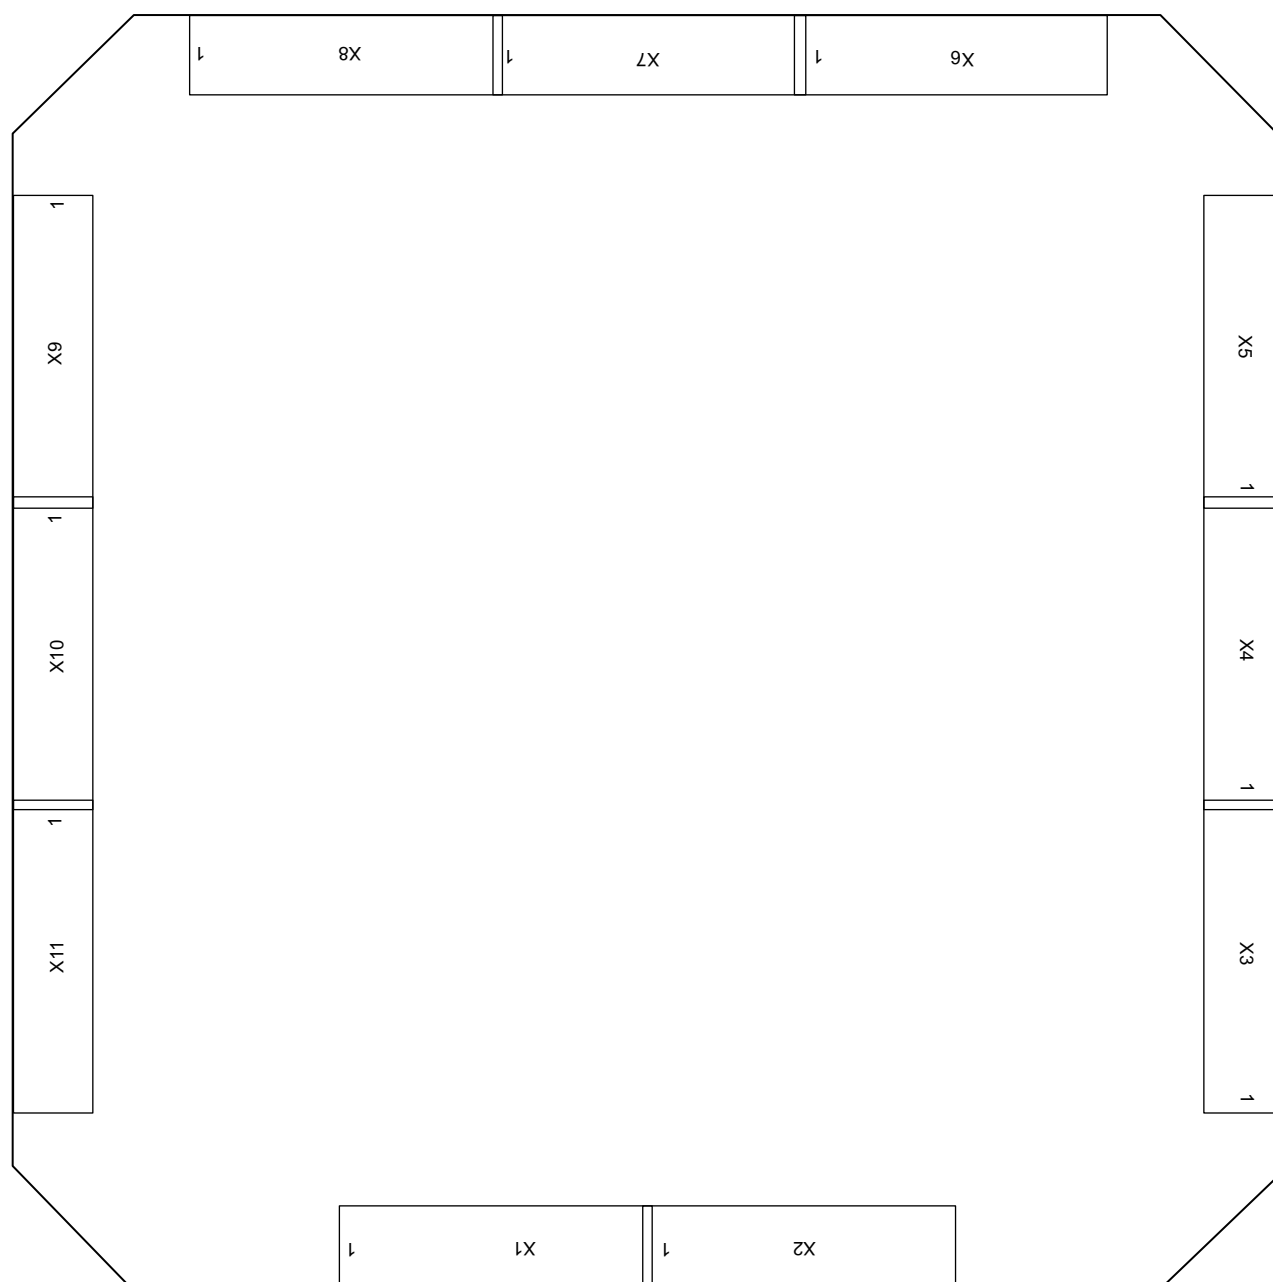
TPS65090EVM Board Layout, Bottom Assembly (mirrored)
